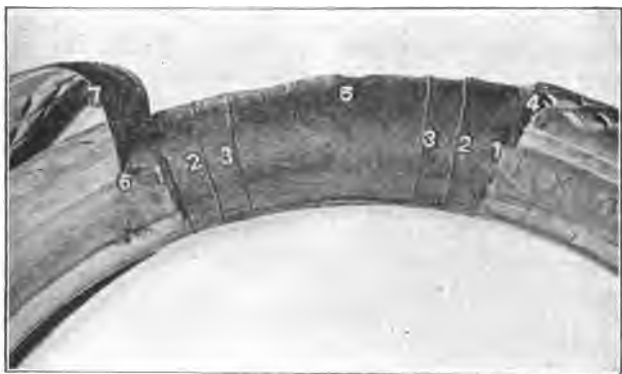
Cutting the complete fabric section. 1—side wall and bead cover removed. 2—first ply of fabric removed to toe of bead. 3—second ply of fabric removed to heel of bead. 4—splice cut at forty-five degree angle. 5—injury skived to feather edge. 6—layback extended to clear side wall cut. 7—the single layback.
